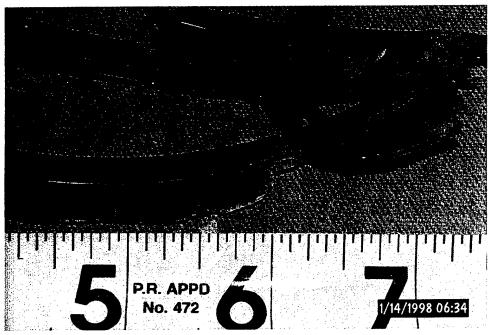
Close-up Photograph of Obturator Pieces Found During the Ballistic Test.
